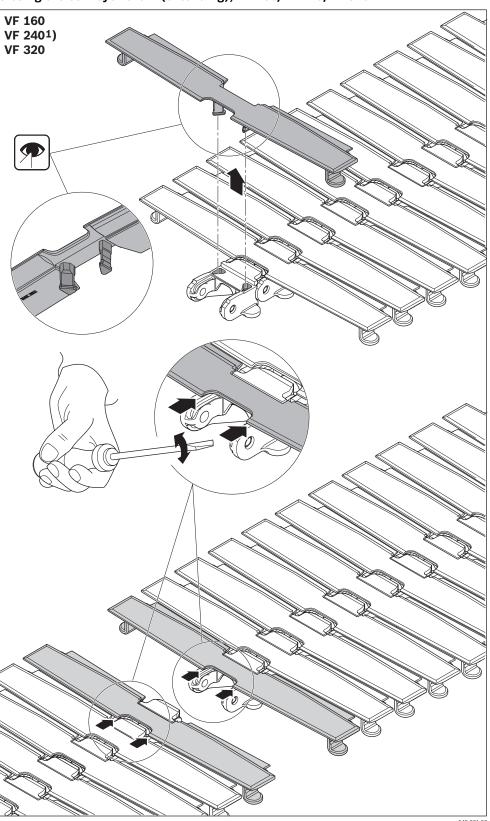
Closing the conveyor chain (extending), VF 160/VF 240/VF 320 $\,$
